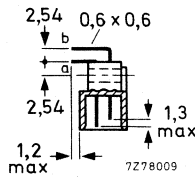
90° angled dip-solder pins, with protruding earth contacts.
